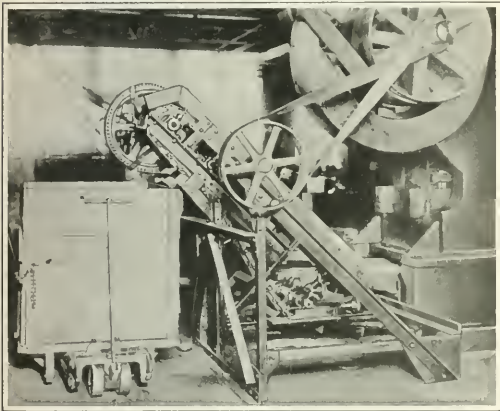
Chain Belt Conveyor for transferring Product of Power Press to a Truck
